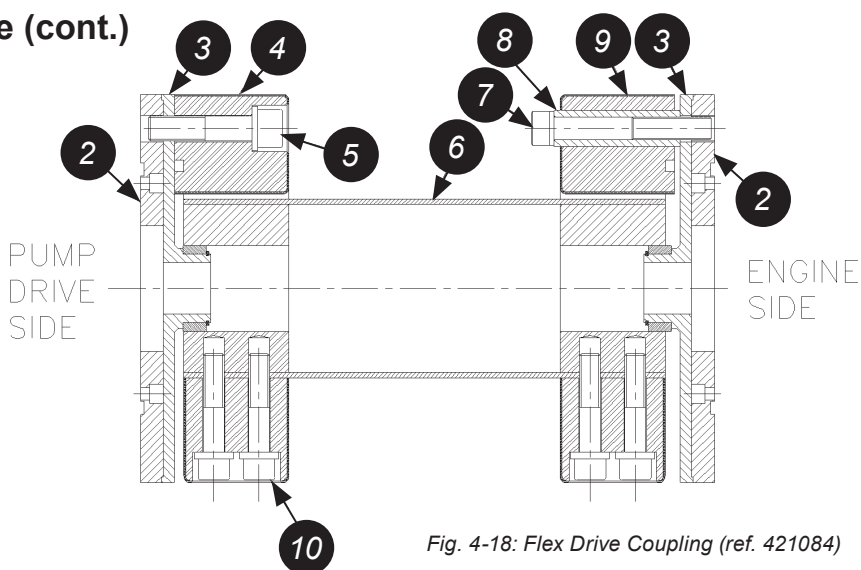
Flex Drive Coupling (ref. 421084)
